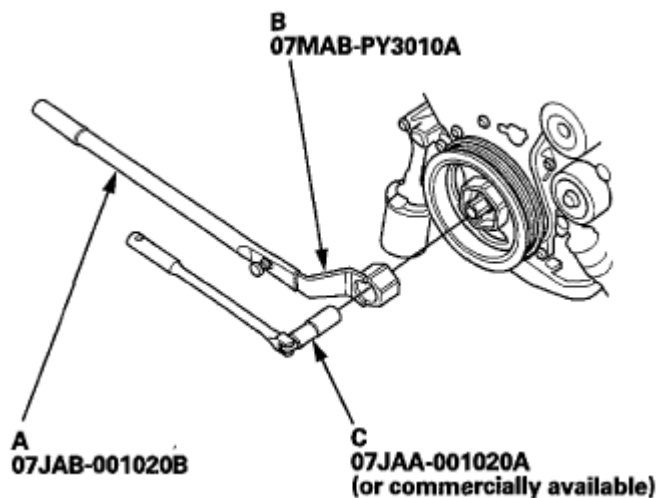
Installing Pulley Using Holder Handle And Holder Attachment
